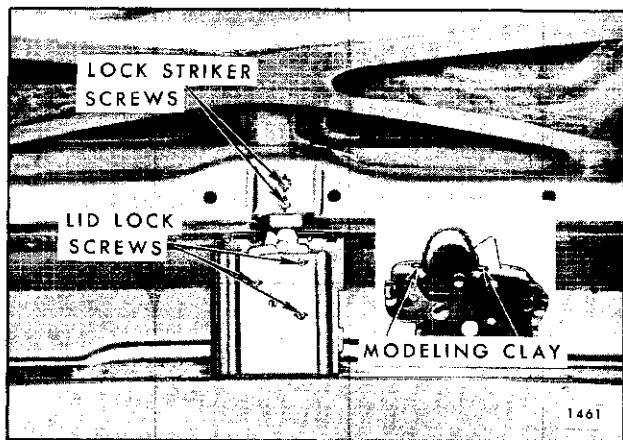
Rear Compartment Lid Lock Assembly — Mounted in Rear End Panel
